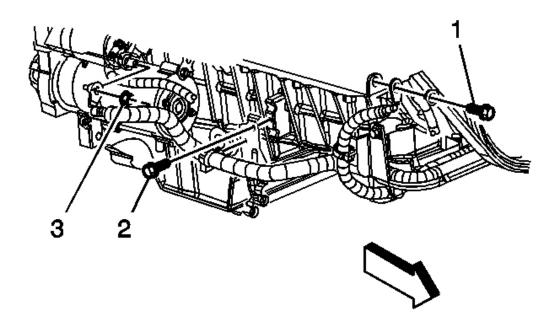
Positive Battery Cable Clip Bolt Courtesy of GENERAL MOTORS CORP.
